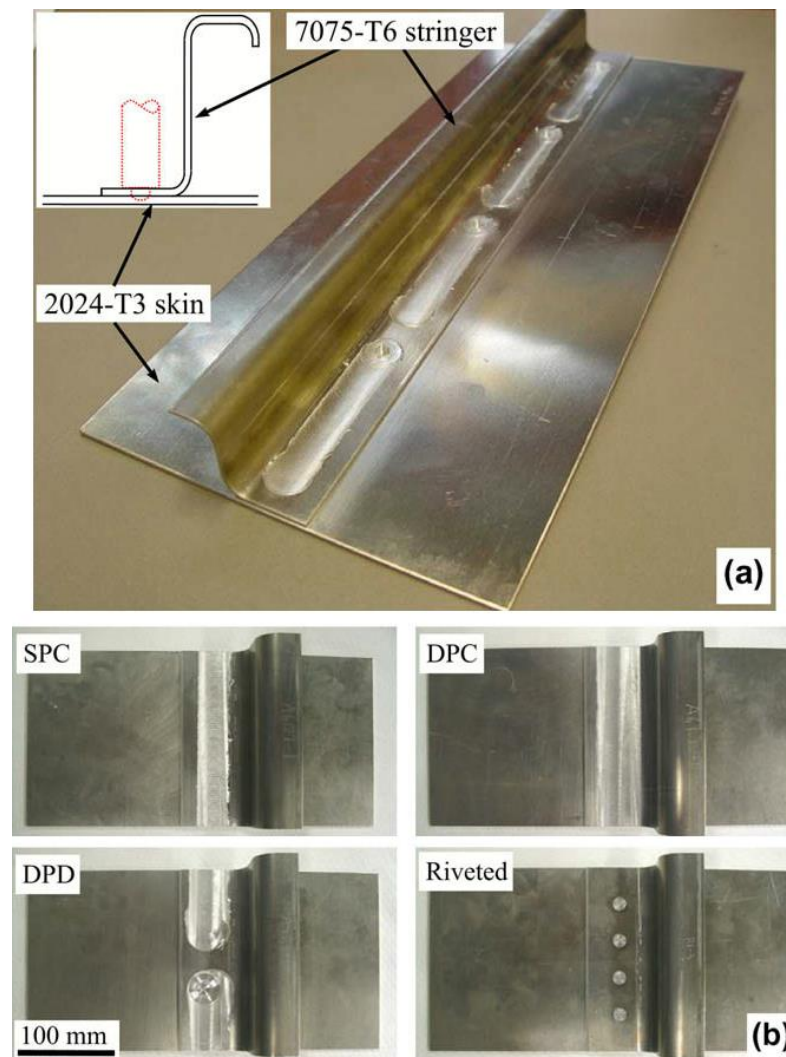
(a) 1.5 mm 7075-T6 Stringer Welded to 2.3 mm 2024-T3 Skin; (b) Lap Joint Configurations: Single Pass Continuous (SPC), Double Pass Continuous (DPC), Double Pass Discontinuous (DPD), Riveted [69]
